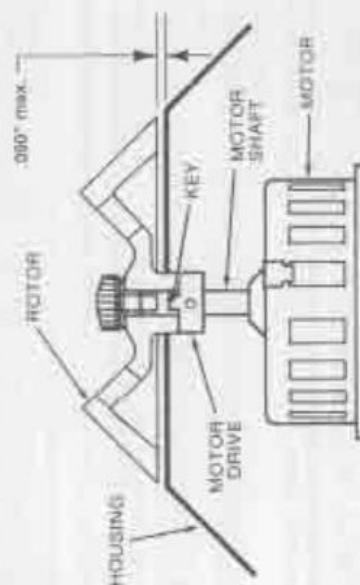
Cutaway View showing Correctly Installed Rotor
